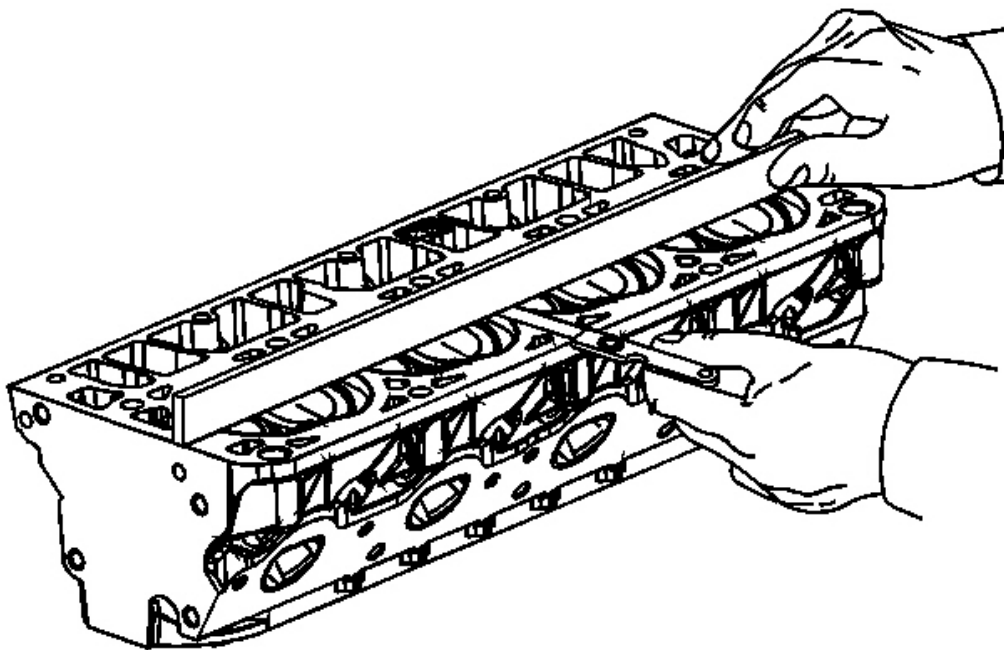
Inspecting Cylinder Head For Warpage
